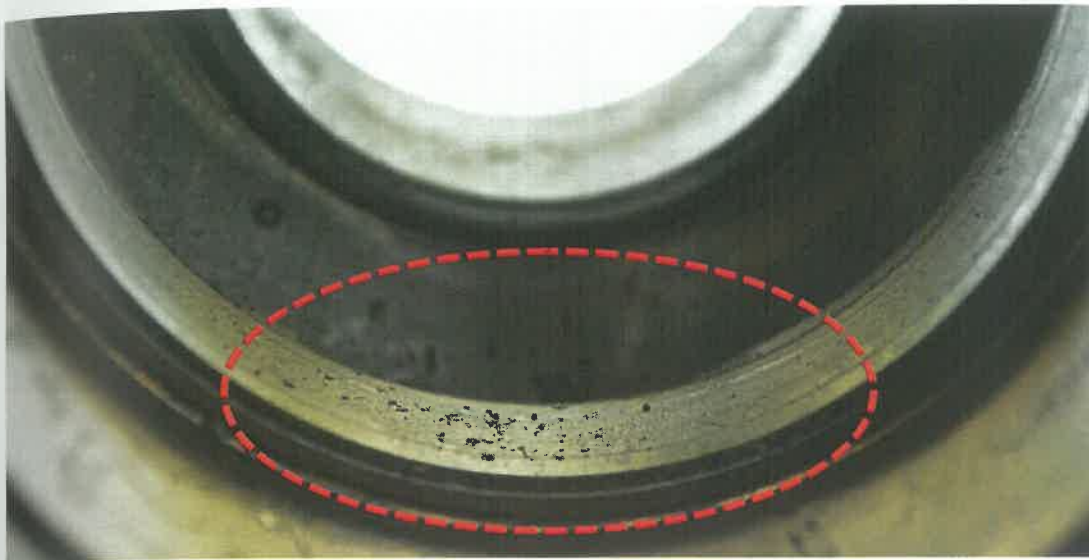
Outer race of roller bearing exhibiting wear marks.
